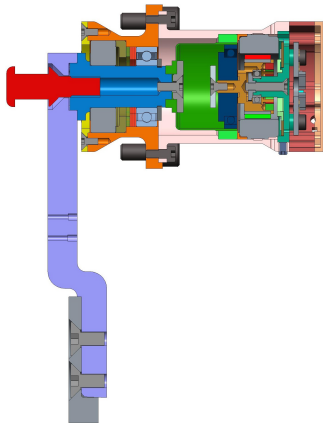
CAD sectional drawing of mobility unit (MobUnit) showing the compact fusion of Harmonic Drive gearing with brushless DC motor.
